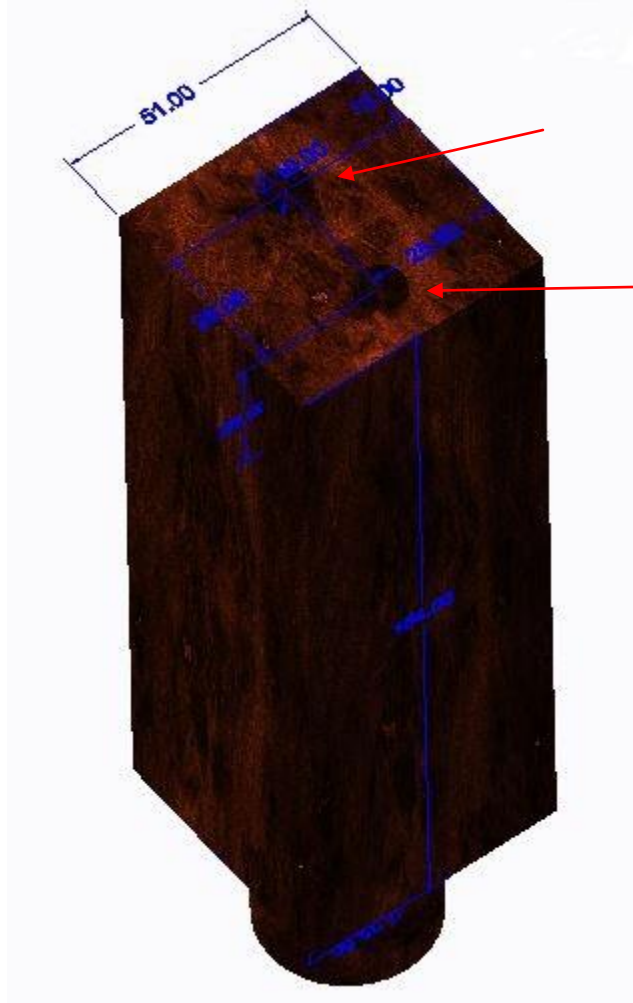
Side view of the piece containing the syringe. Cutout and bottom protrusion are clearly visible.
